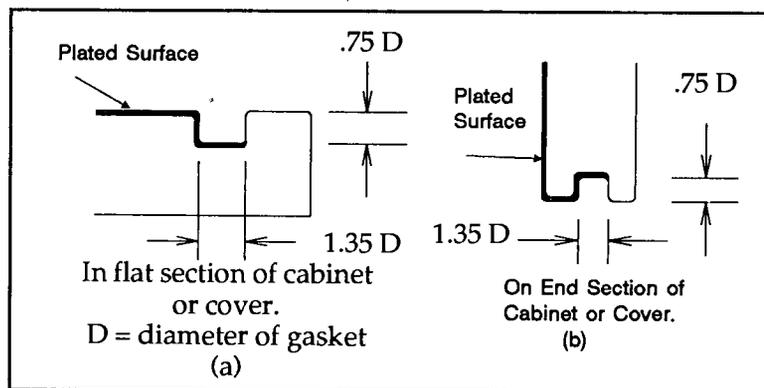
Recommended Groove For Convoluted Spring Gasket.
